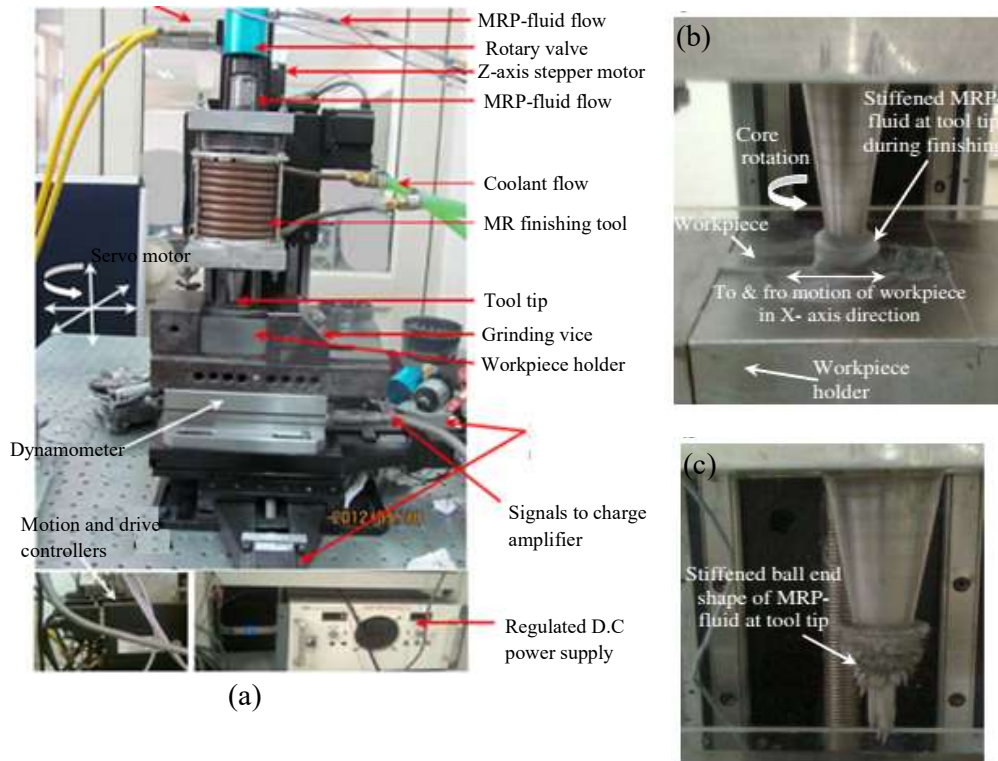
Ball end magnetorheological (MR) finishing (a) experimental setup, (b) stiffened MR polishing fluid during machining, (c) stiffened ball end at tool tip [18]
